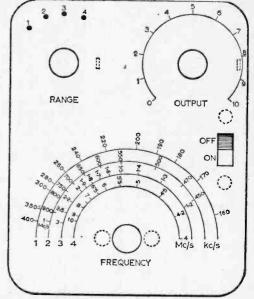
Oscillator scale plate. This is made up from 18s.w.g. aluminium covered with drawing paper.
